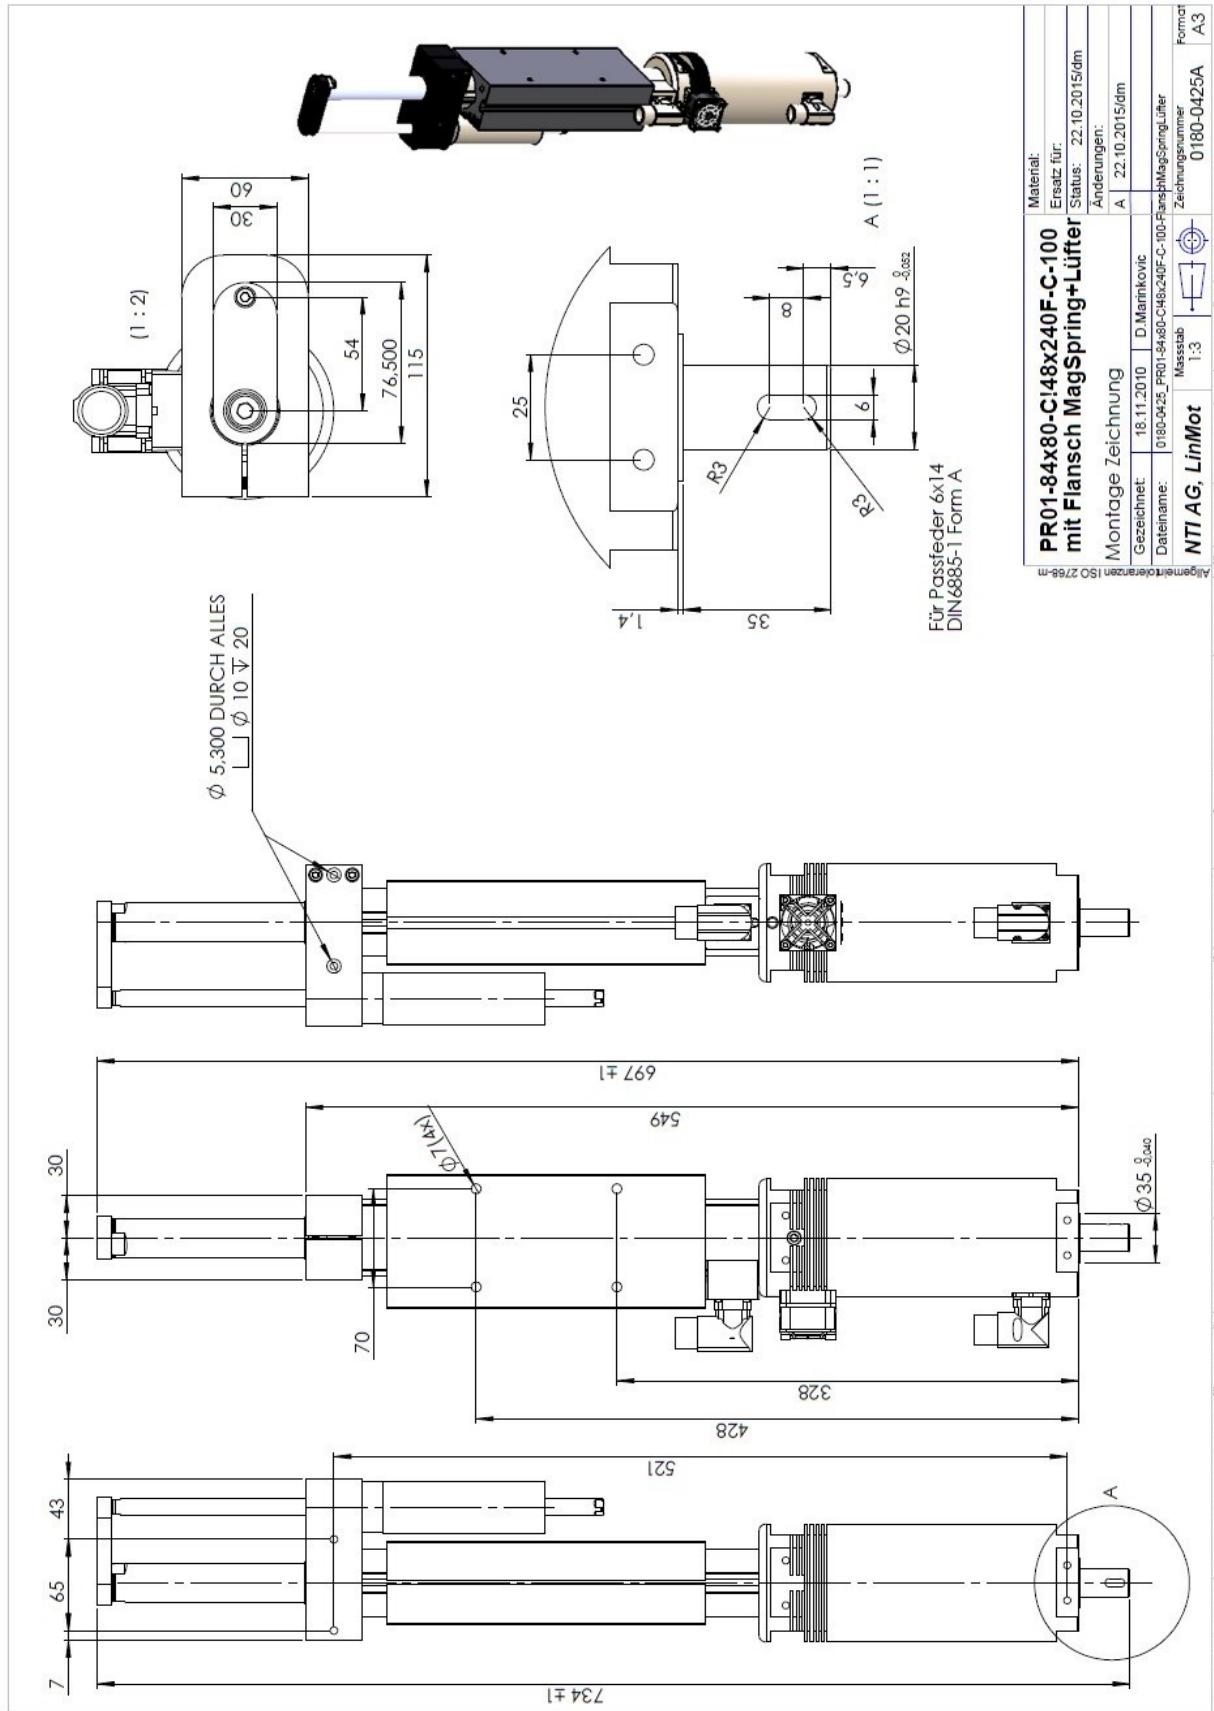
80-C/48x240F-C-100 with Flange PF01-48x226
